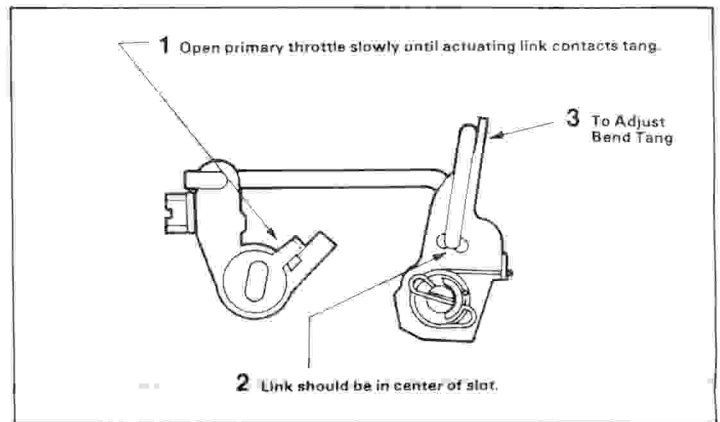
SECONDARY THROTTLE OPENING ADJUSTMENT (On Engine)
